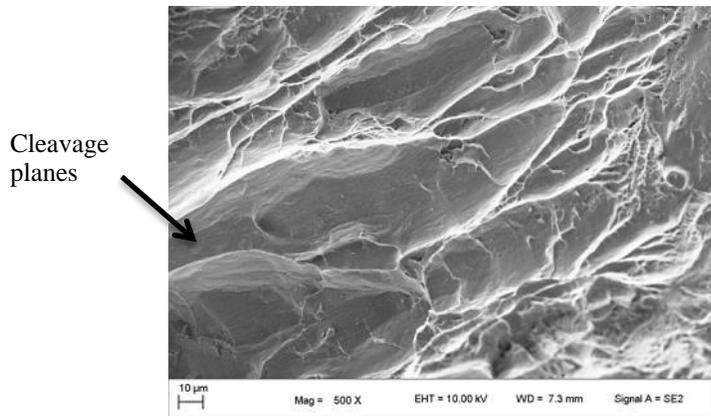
Fracture surface of solution super β -transus , 1050°C/2h showing predominantly cleavage planes with some dimples, indicating mixed failure.
